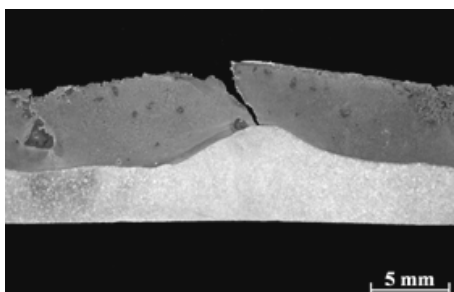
"Open" cracks of the high-chromium cast iron-surfaced layer, reaching the base material [2]
